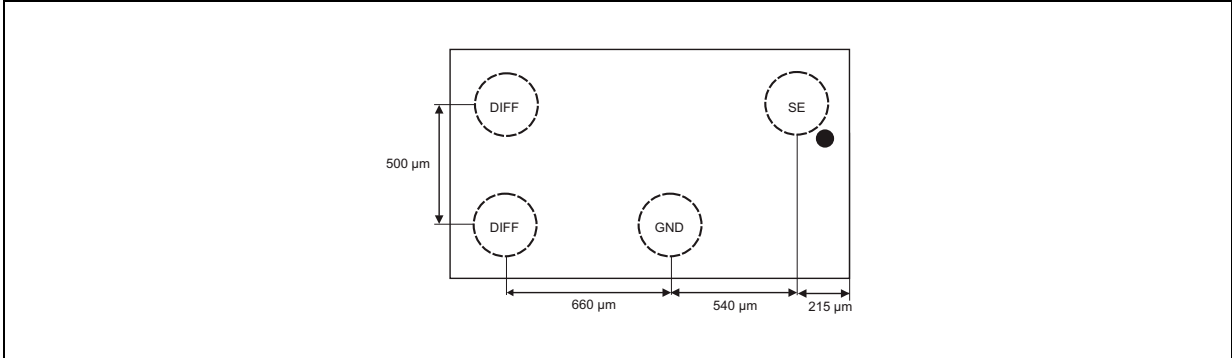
Footprint - 3 mils stencil - non solder mask defined
